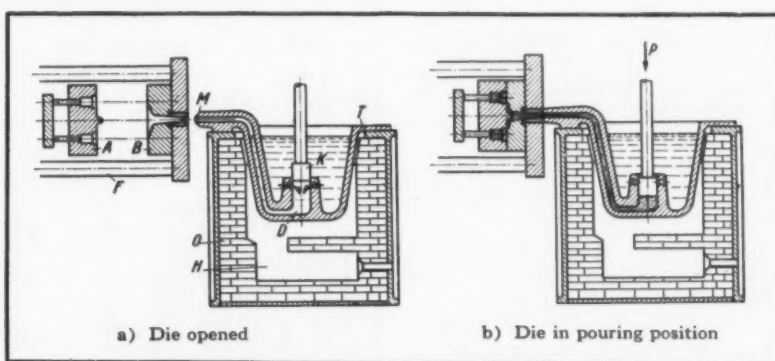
Hot-chamber plunger-type pressure-casting machine shown with the die opened in left drawing and in pouring position on right. Parts are: A, ejection die; B, cover die; F, machine tie bars; M, orifice; T, crucible; D, cylinder; K, plunger; O, furnace; H, heating chamber.
